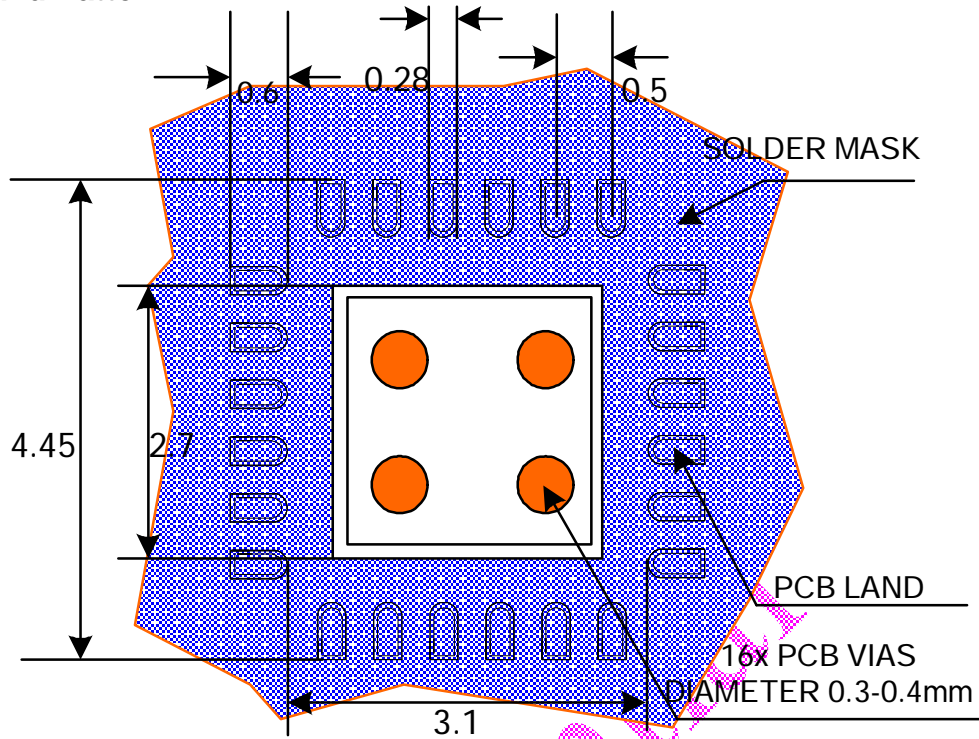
PCB Land Pattern for 24-Pin QFN
